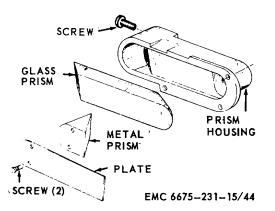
Micrometer circle illumination prism, disassembly and reassembly.
